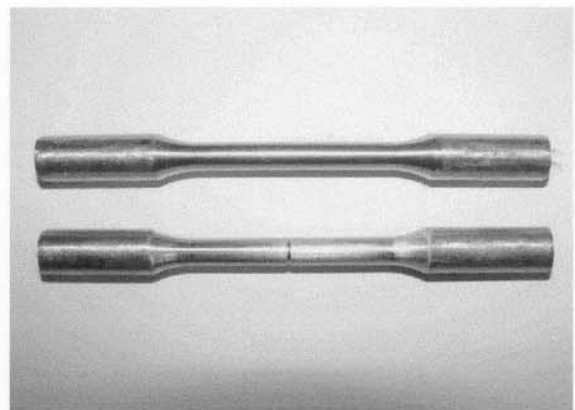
Photograph of fatigue test smooth and notch specimens.
